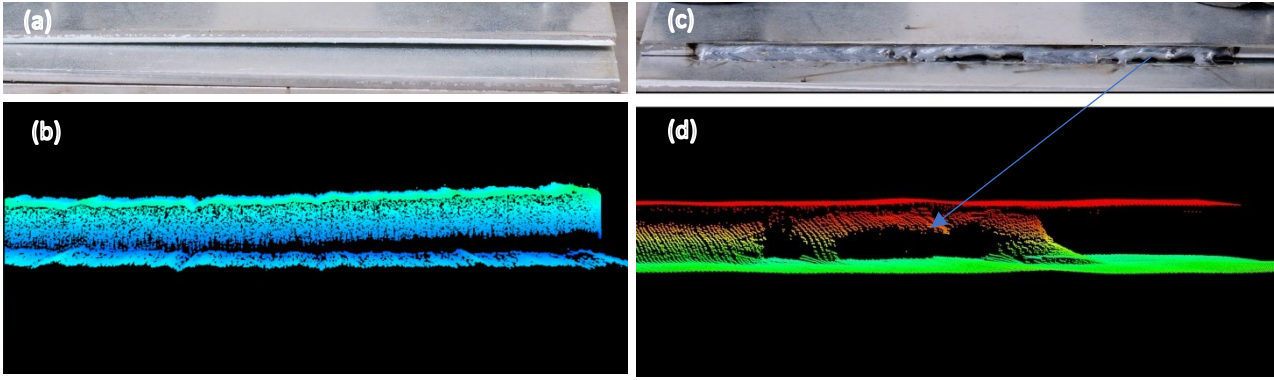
(a), (c) Photographs and (b), (d) corresponding 3D OCT images of the (b) lap joint with the gap and (d) weld bead with the pores created via tactile laser welding.
